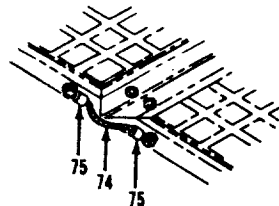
Electrical Equipment Installation (Sheet 14 of 19)
